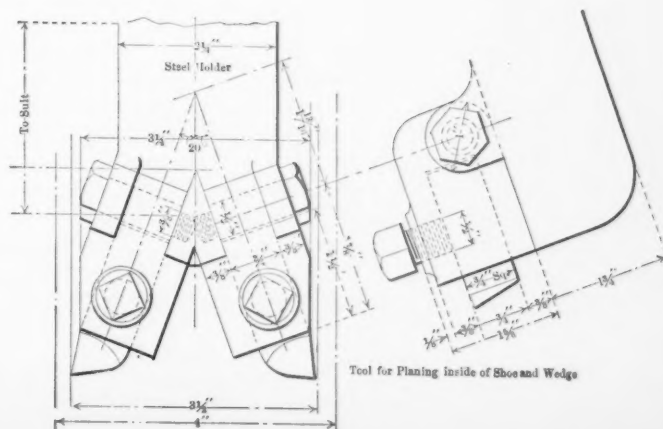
PLANER TOOL FOR FINISHING INSIDE OF FLANGES.
